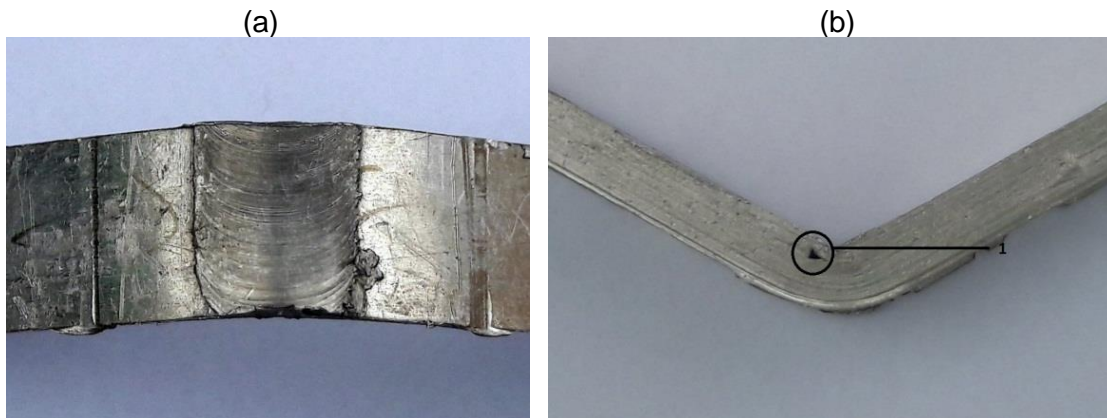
Views of weld 8 after flexural test a) the surface b) the side
